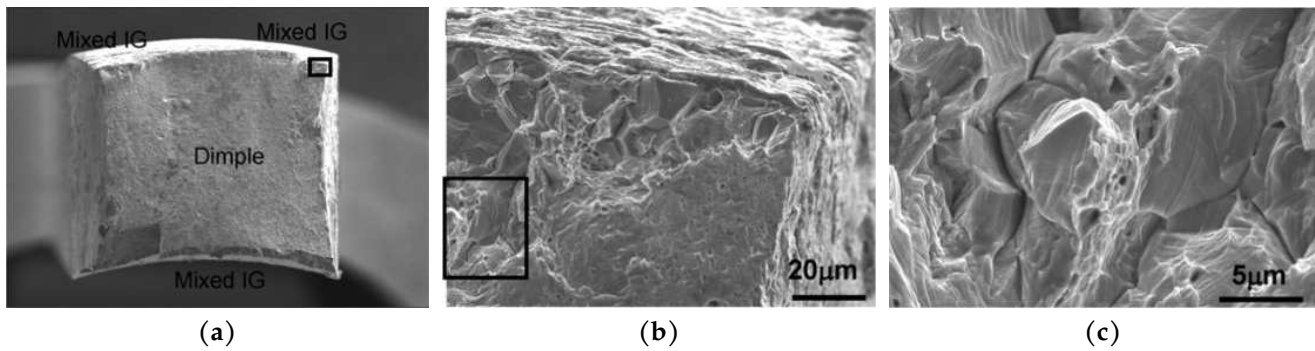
Fracture surface of 316 thimble tubes irradiated to 73 dpa and fractured by slow tensile testing ($\dot{\epsilon} = 7 \cdot 10^{-8} \text{ s}^{-1}$) at 320 °C (Fukuya et al., 2008).
